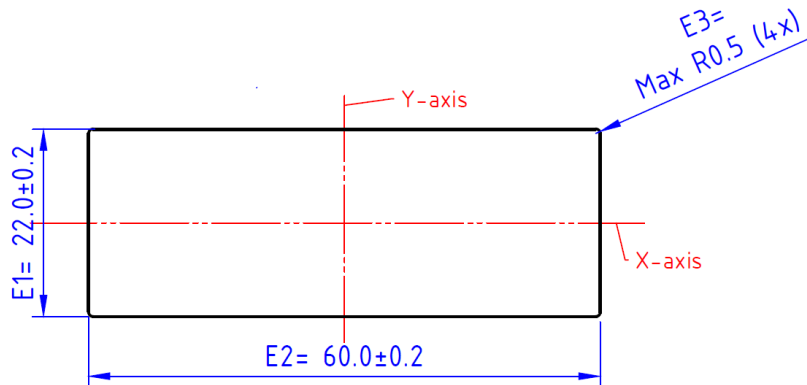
Dimensions of the LEX-S- category R60x22.
